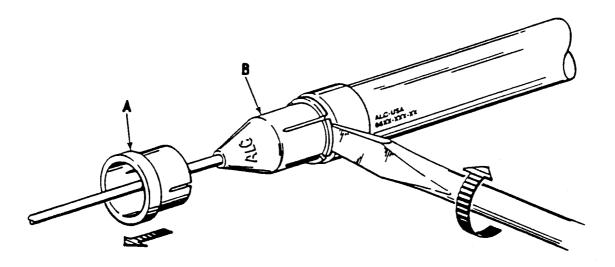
REMOVAL OF LOCKING RING AND LAMP CONNECTOR BODY
